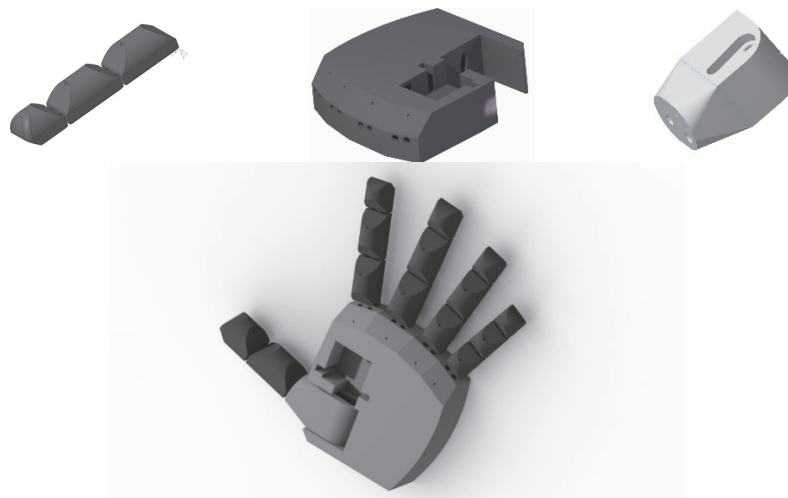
Parts and assembly of cyber prosthesis virtual prototype in PTC Creo.
